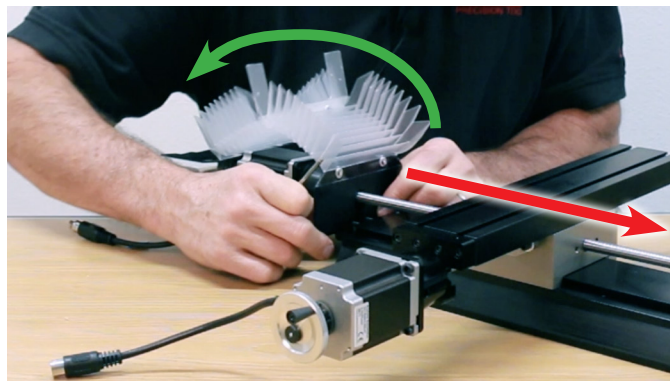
The green arrow shows the way cover folded over for easier viewing of the mounting screws. The red arrow shows the direction to push the saddle to bring the cover plate and adapter into contact with the mill base.
